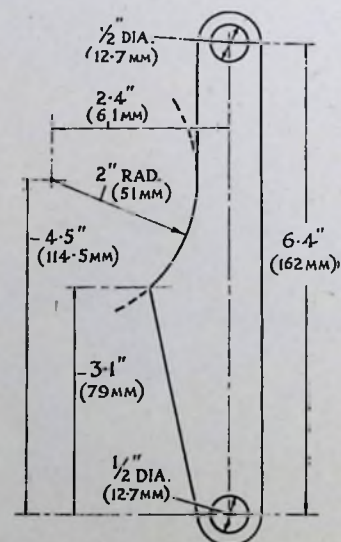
Dimensions of clamp plate for solenoid spring. (Make from steel plate at least $\frac{3}{8}$ " (9.5 mm.) thick.)
